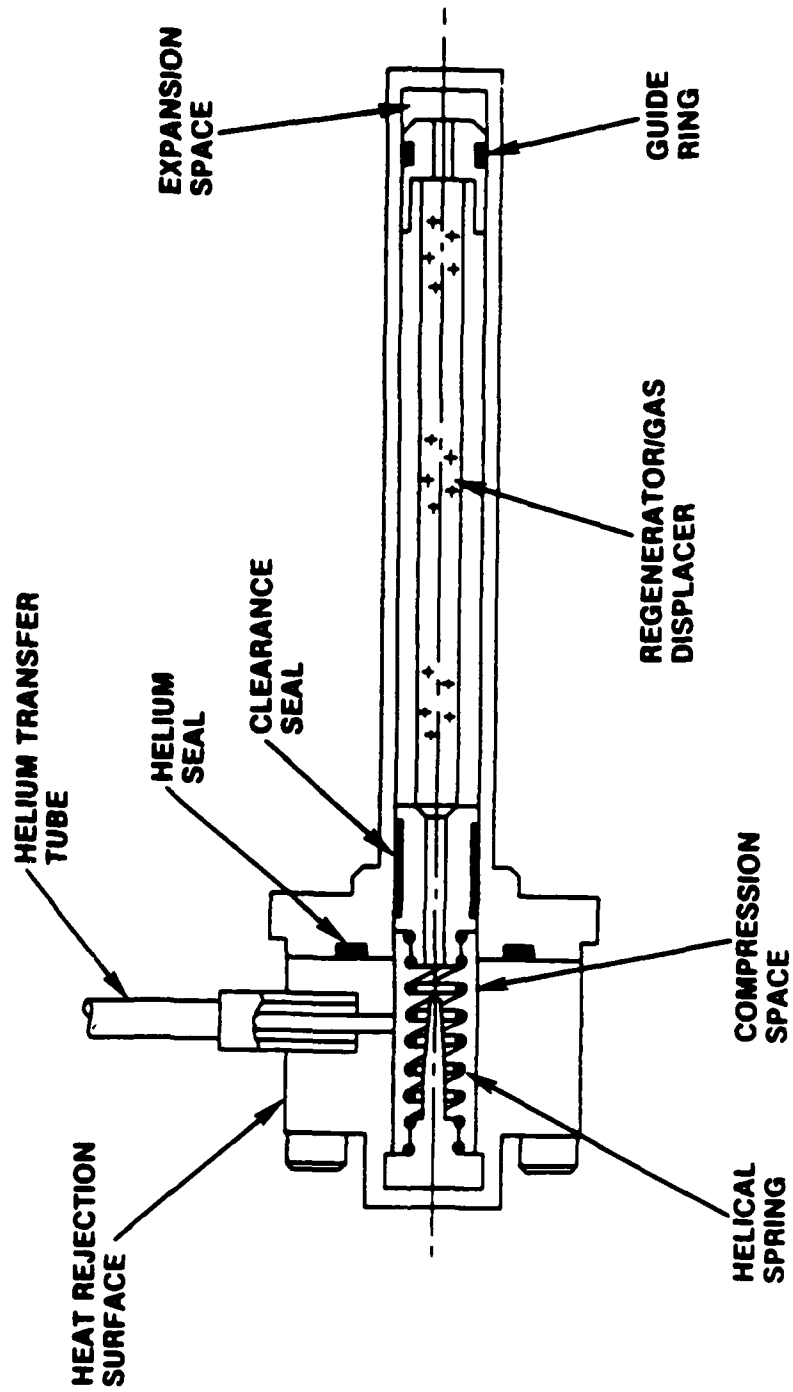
Illustration of Magnavox Linear Cooler Cold Finger
